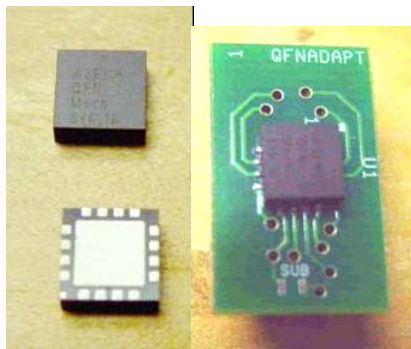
QFN 16-Lead, 6x6 mm Stacked Die Sensor
